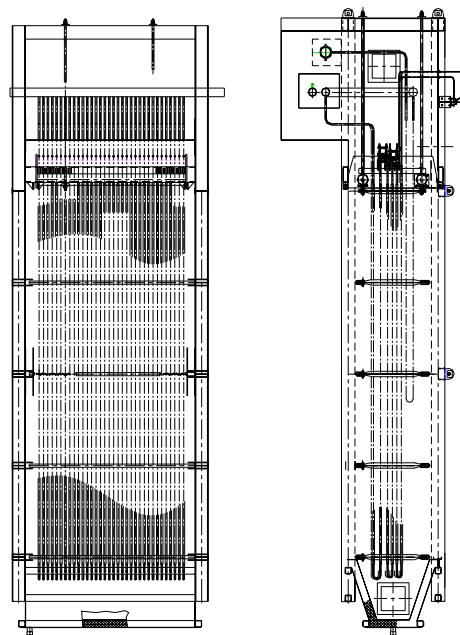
Vertical Tube/Horizontal Gas Flow Arrangement
